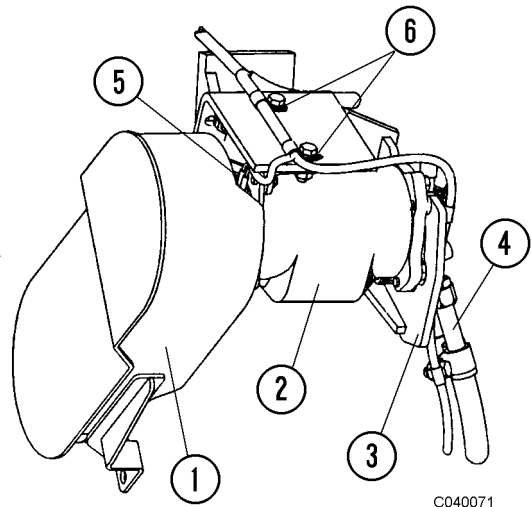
AIR CONDITIONER COMPRESSOR
